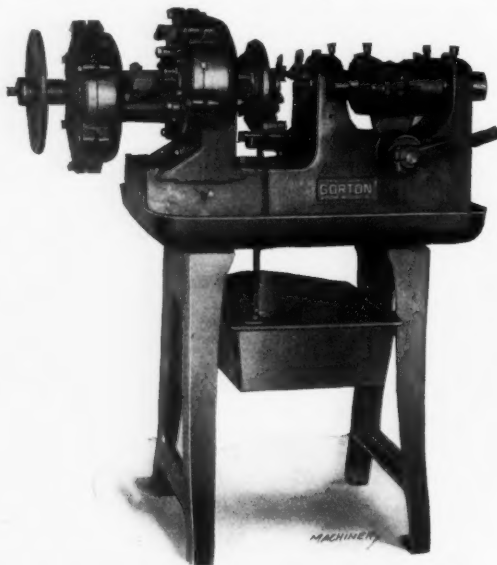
Gorton No. 8-C Universal Fuse Ring Milling Machine
